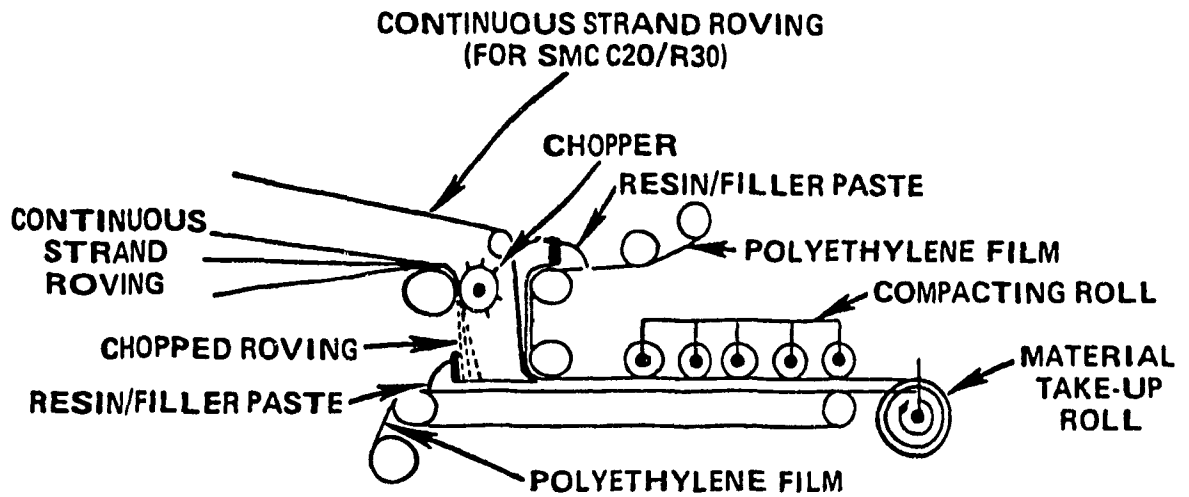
Schematic of machine used to make sheet molding compounds, [1] .
